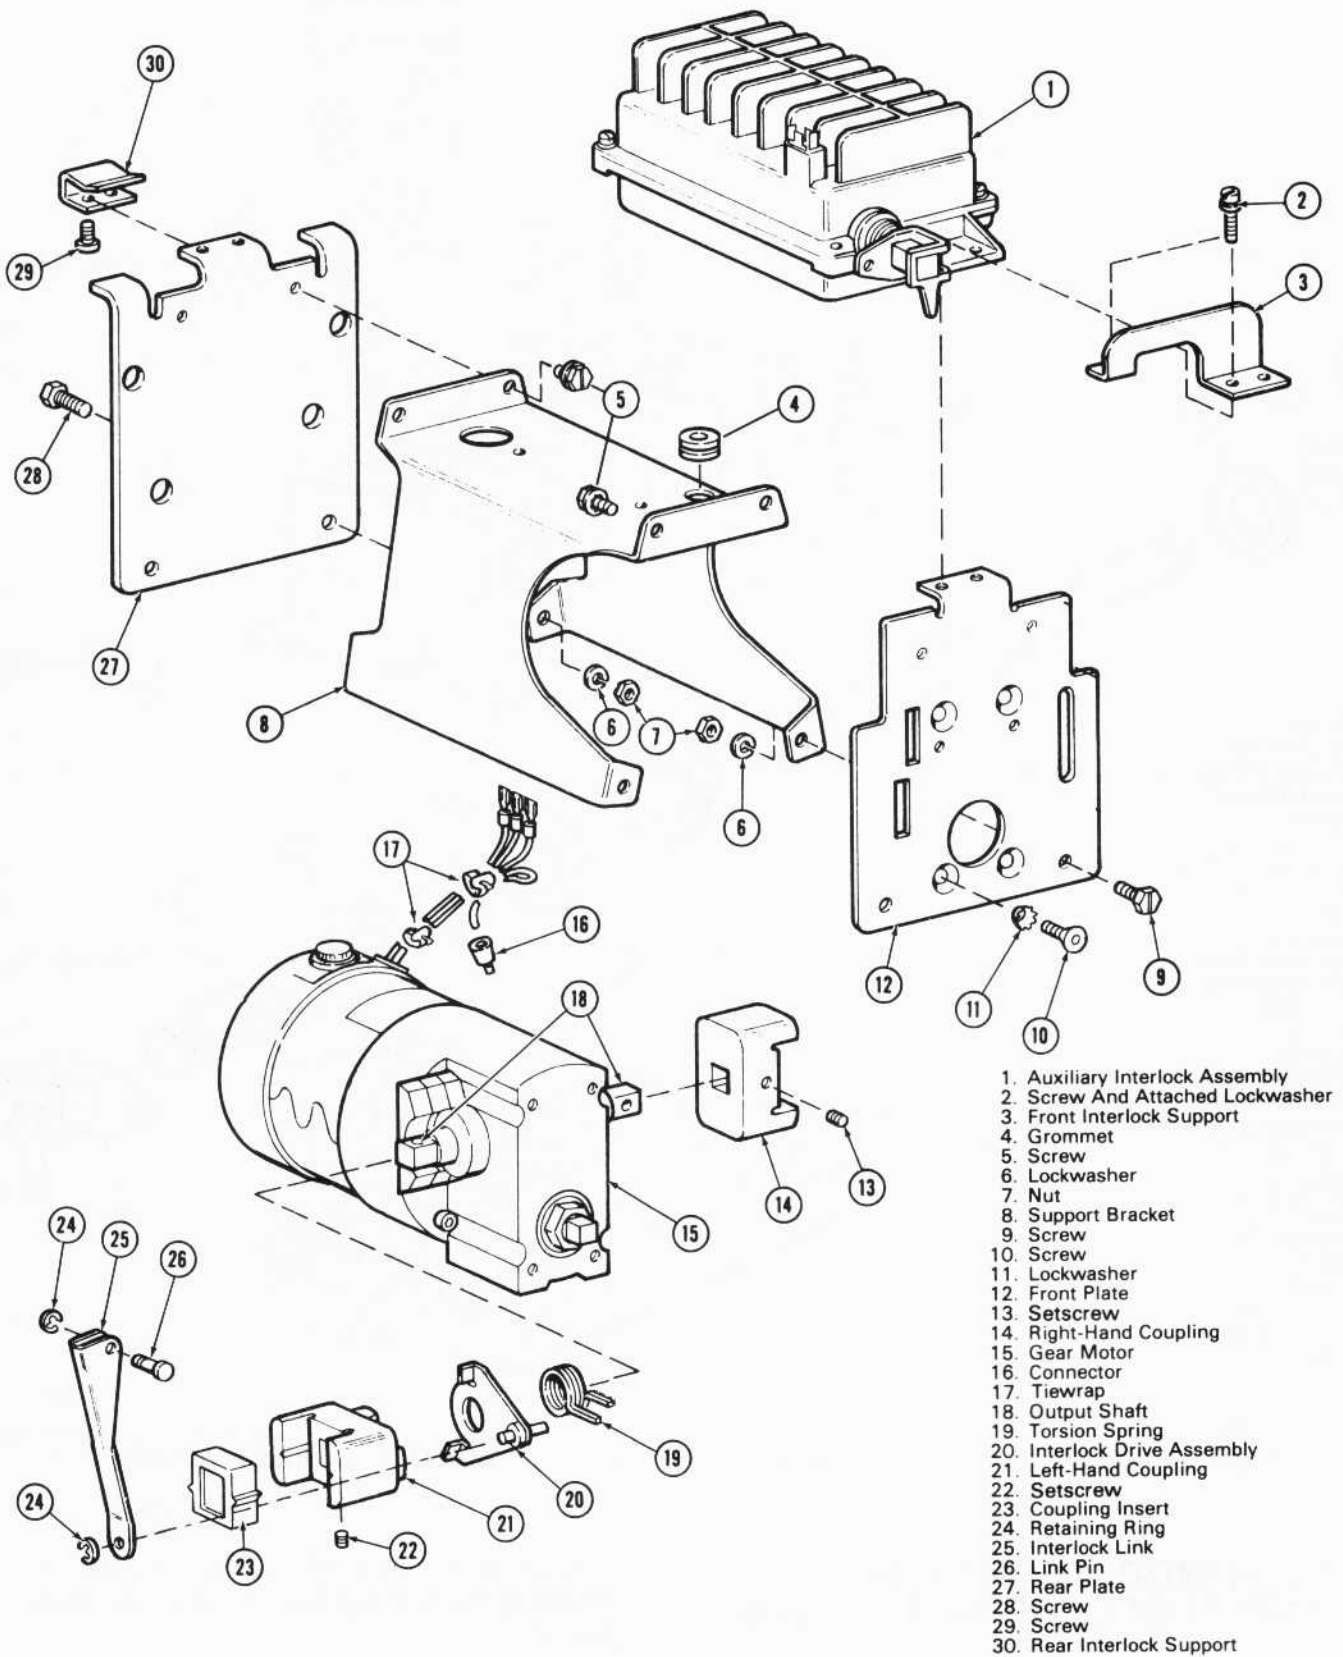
Auxiliary Interlock Assembly (Camshaft Assembly 508 Or 509), Exploded View
